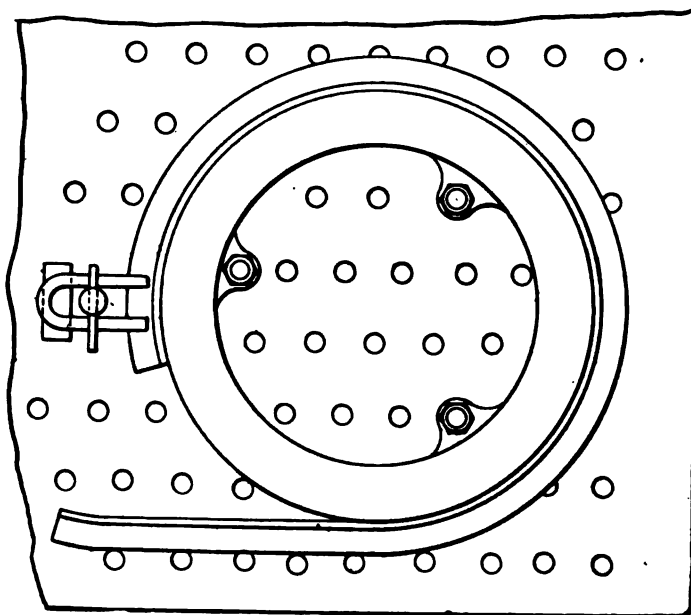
Bending Large Ring on Circular Block Bolted to the Levelling Block.
